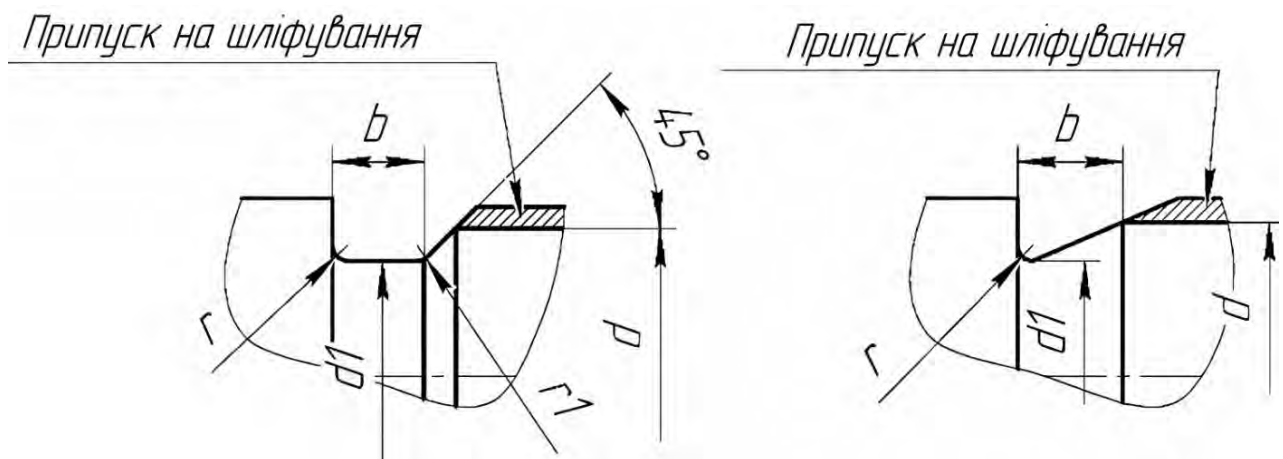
Drawings with designations of the main dimensions of the grooves (to Table 2)
